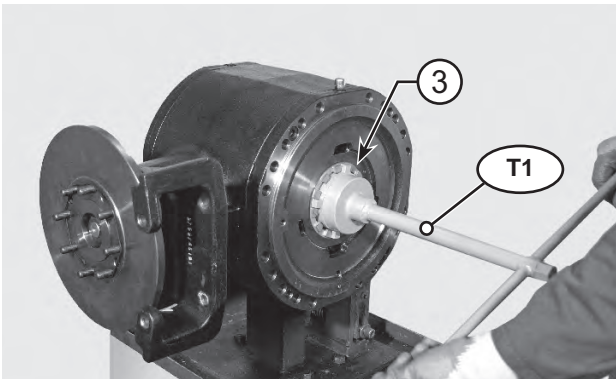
Only if need removing or adjusting. Using tool T1 (See drawing T1 p. 53), loosen and remove the ring nuts (3).
